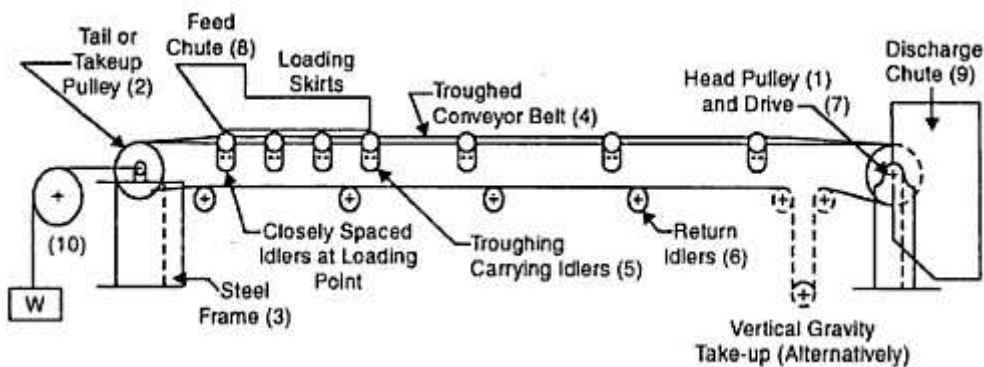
Layout of the conveyors of the main haulage system, (PT—a belt conveyor)
